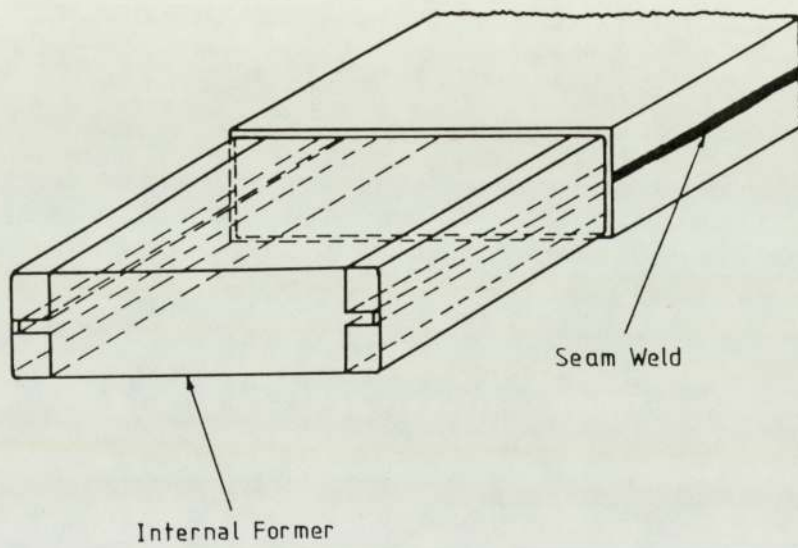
Exploded View of Plane-Strain Arrangement. Two Oversized Tensile Blanks are MIG Welded Together and an Internal Former Inserted to Prevent Lateral Contraction.
